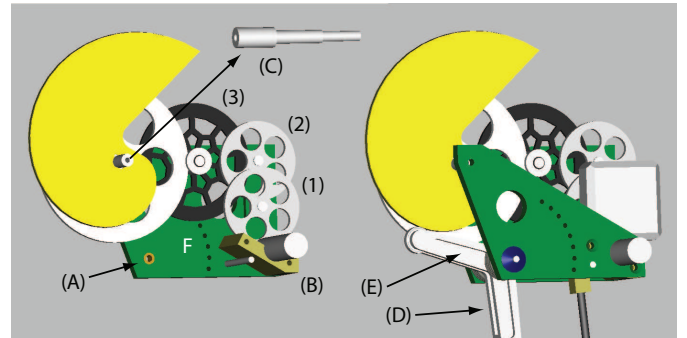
CAD model of the gearbox. (A) brass bearing to reduce friction, (B) distance piece to align the two body plates, (C) cam axis, (D) slot in main leg for the cam, (E) main leg and, (F) series of holes for spring setting. (1),(2) 0.2mm POM gears and (3) 0.3mm POM gear
